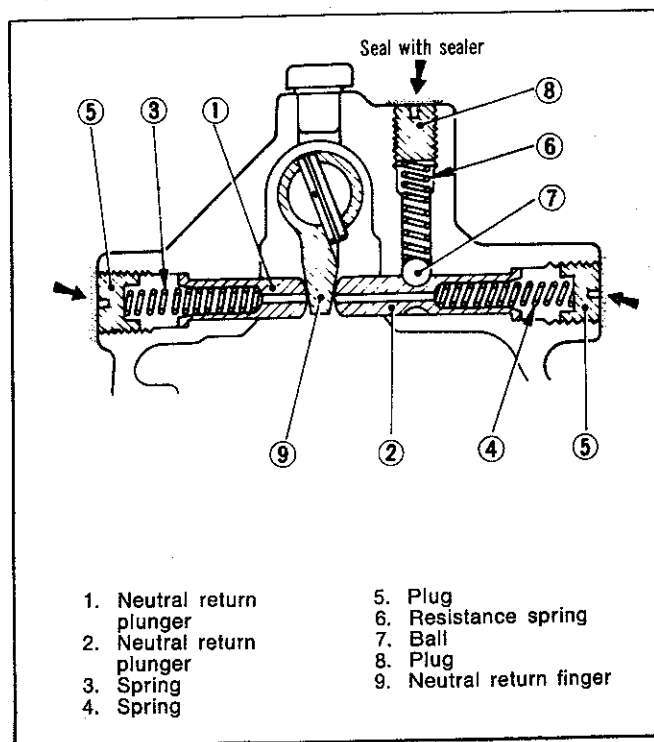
Neutral return and resistance spring assembly (early transmission)
